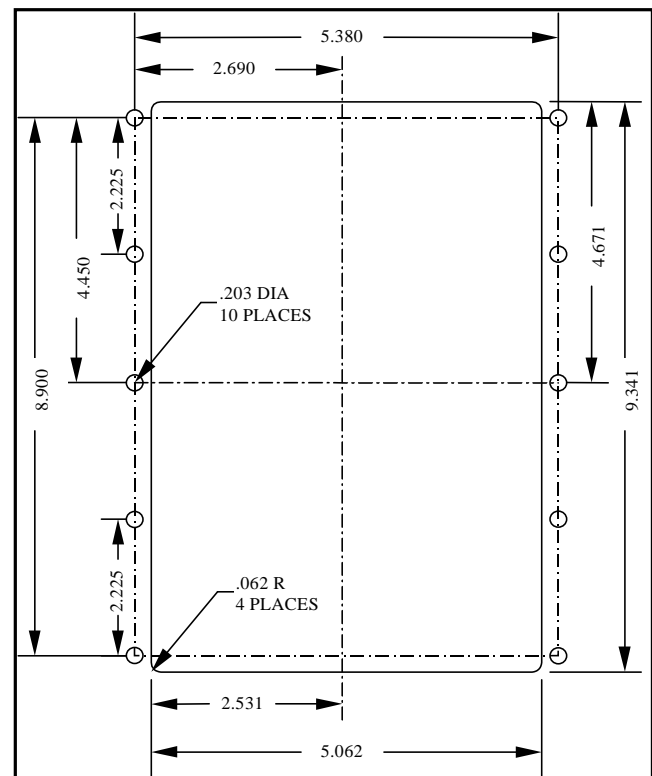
PANEL CUTOUT DIMENSIONS (INCHES)
